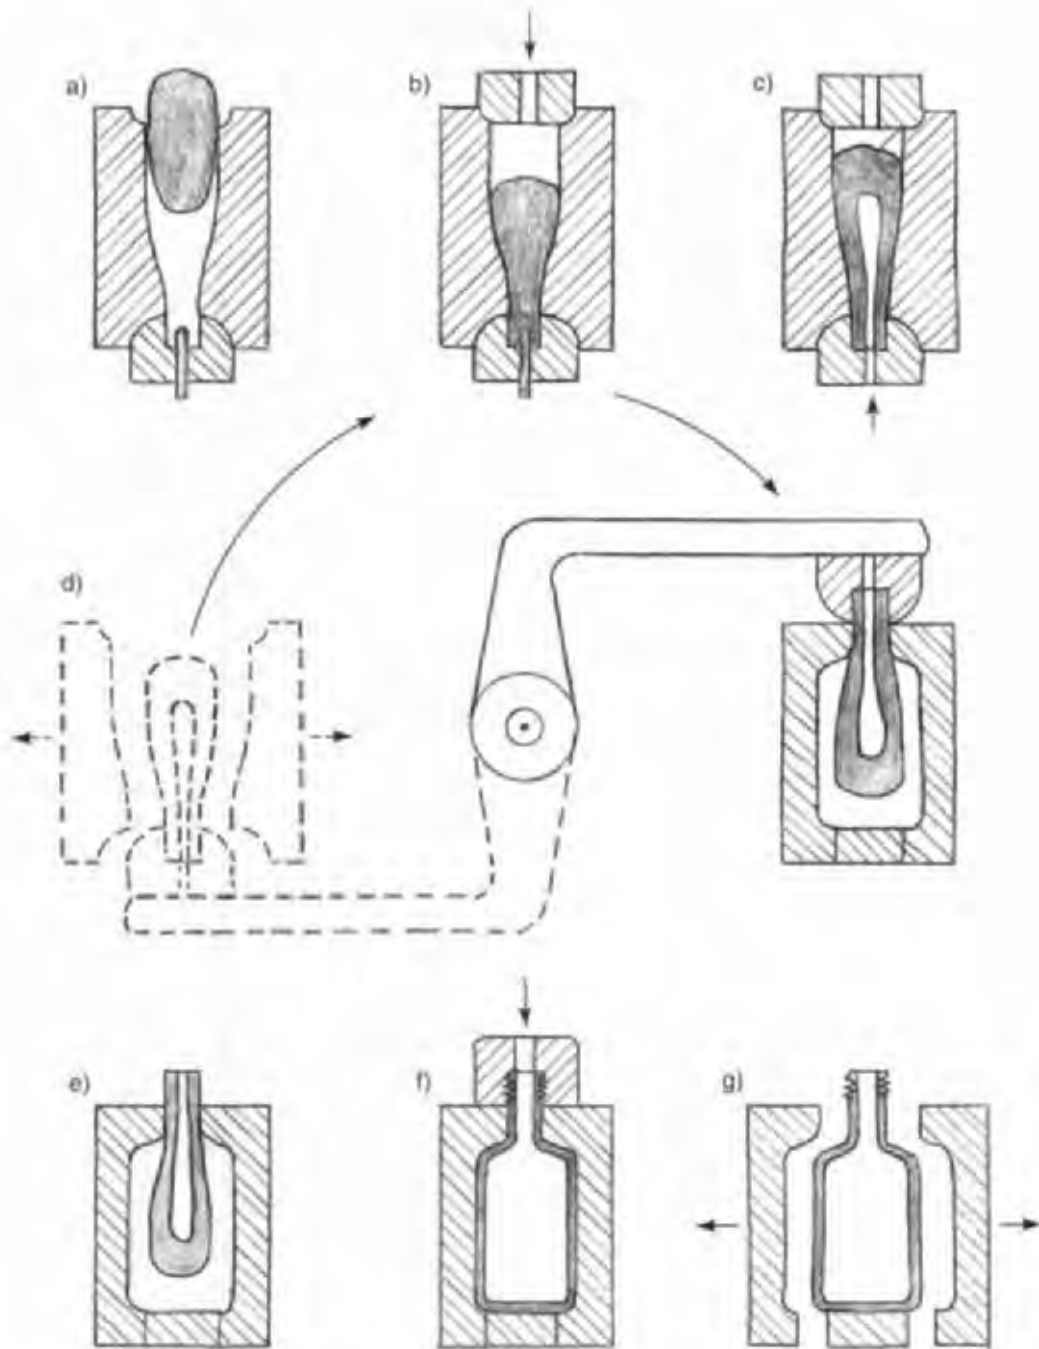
A2b3c The blow-blow molding process. a) Gob feeder places gob of molten glass in the parison mold. b) air pressure from the top of the mold settles the gob at the bottom of the mold. c) Counter blow - a brief blast of air from the bottom of the mold forms a bubble in the parison. d) The parison mold opens and the parison is removed, inverted and transferred to a bottle mold. e) The parison, in the bottle mold, is reheated. f) A blowing head is placed at the top of the mold and, with a final blow, inflates the glass bubble to a bottle shape. g) After some cooling, the mold opens and the cooler bottle is removed from the mold.
